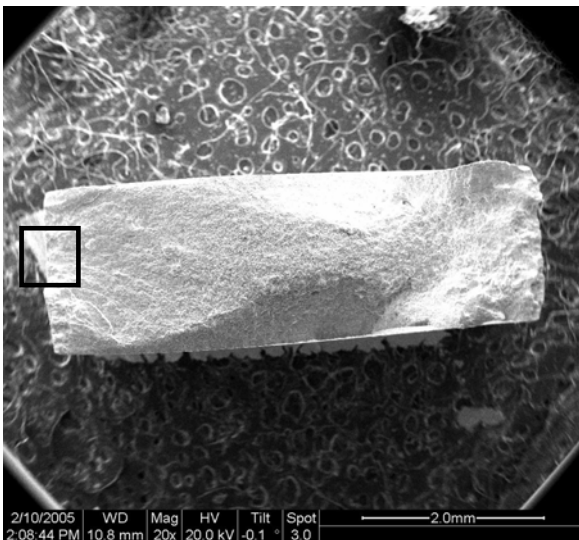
Specimen Ti-05, overall view of fracture surface
